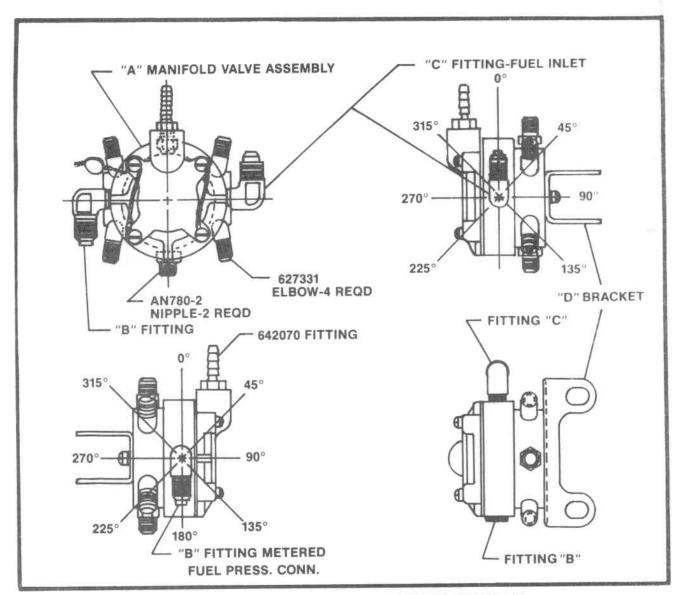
A. MANIFOLD VALVE FITTING ORIENTED.
